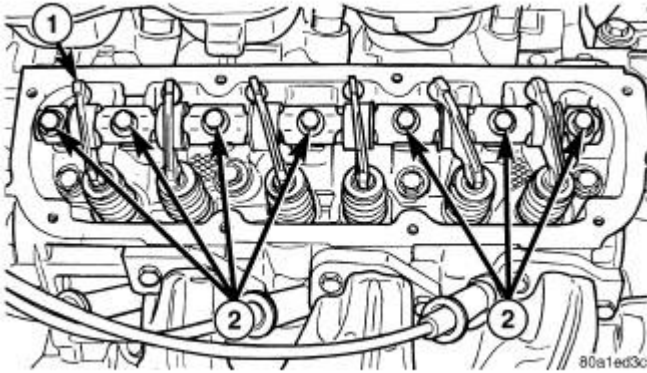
Rocker Arms, Shaft Assembly & Bolts
